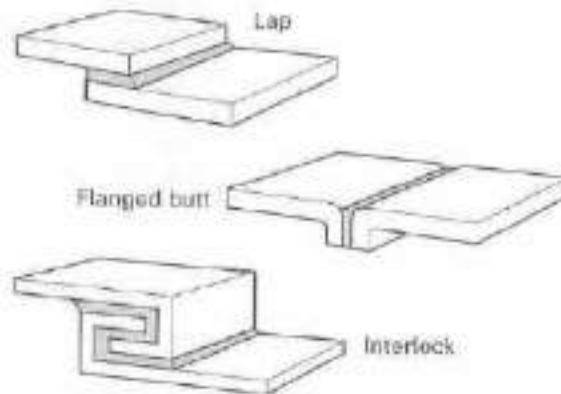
Some common designs for soldered joints. (Courtesy of Lead Industries Association.)
